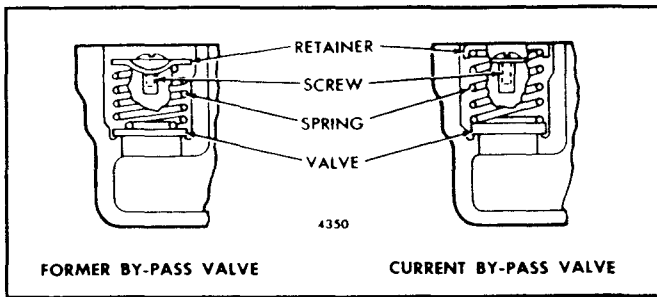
By-Pass Valve Assembly Secured by Retainer and Screw
